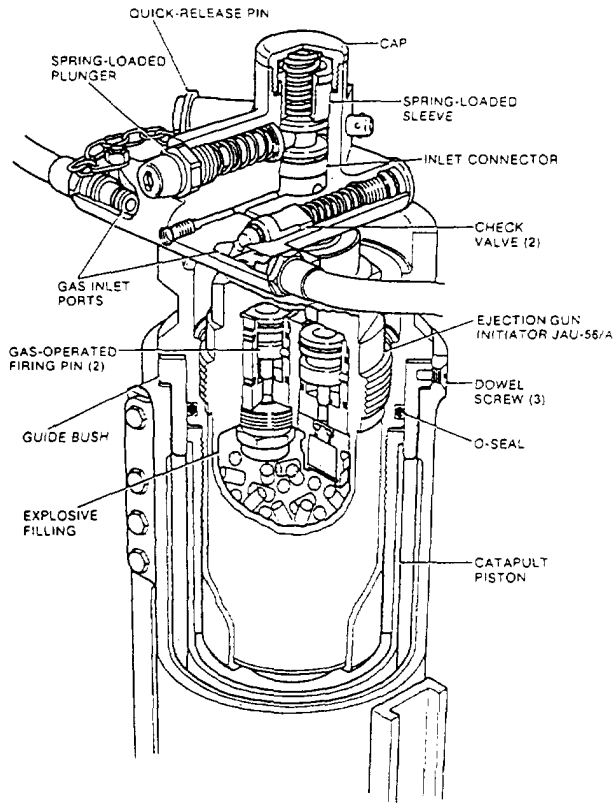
Ejection gun initiator (JAU-56/A) and catapult manifold valve.
